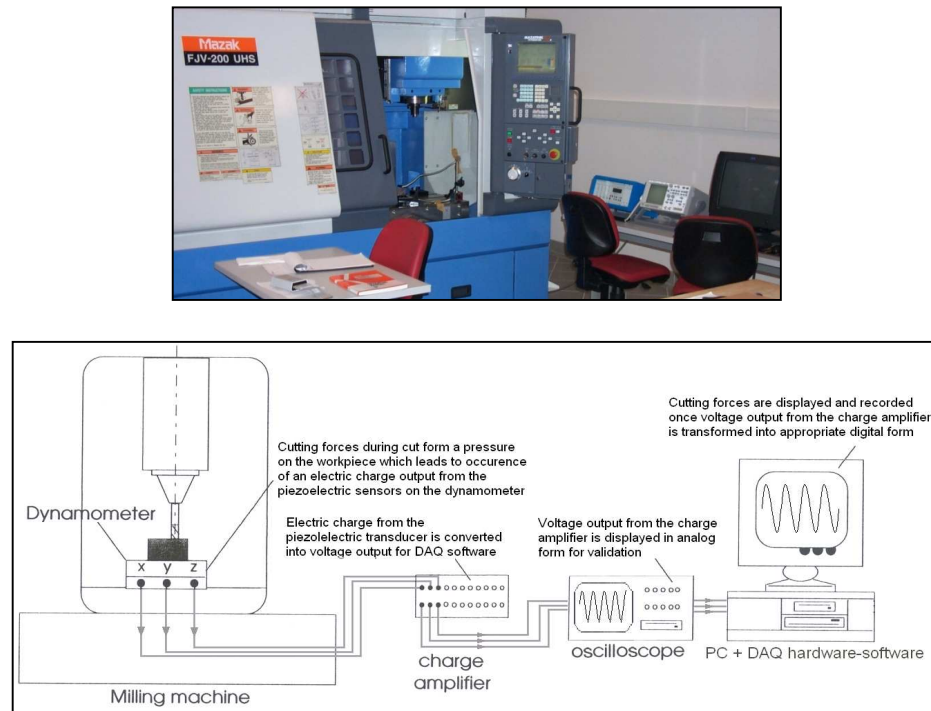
The experimental setup for measurement of cutting forces; a) Actual testing environment, b) Detailed illustration.
